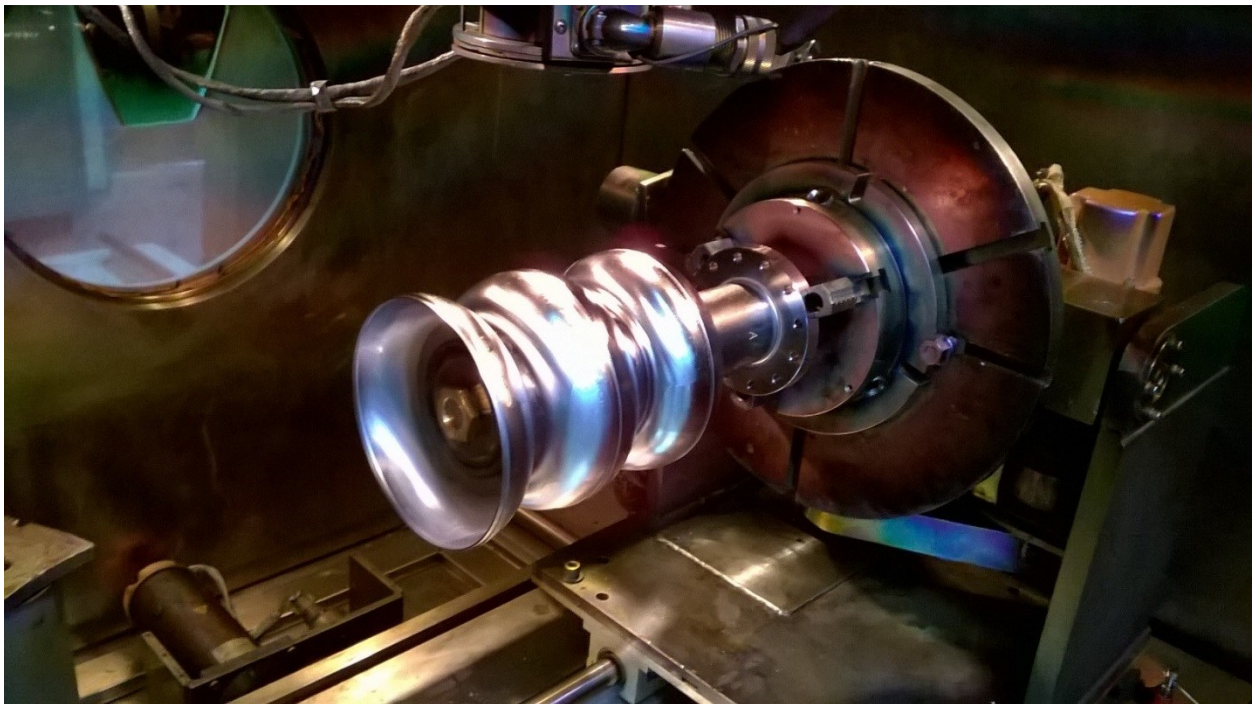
Picture of a subassembly of cavity 5C75-002 in the EB machine.
